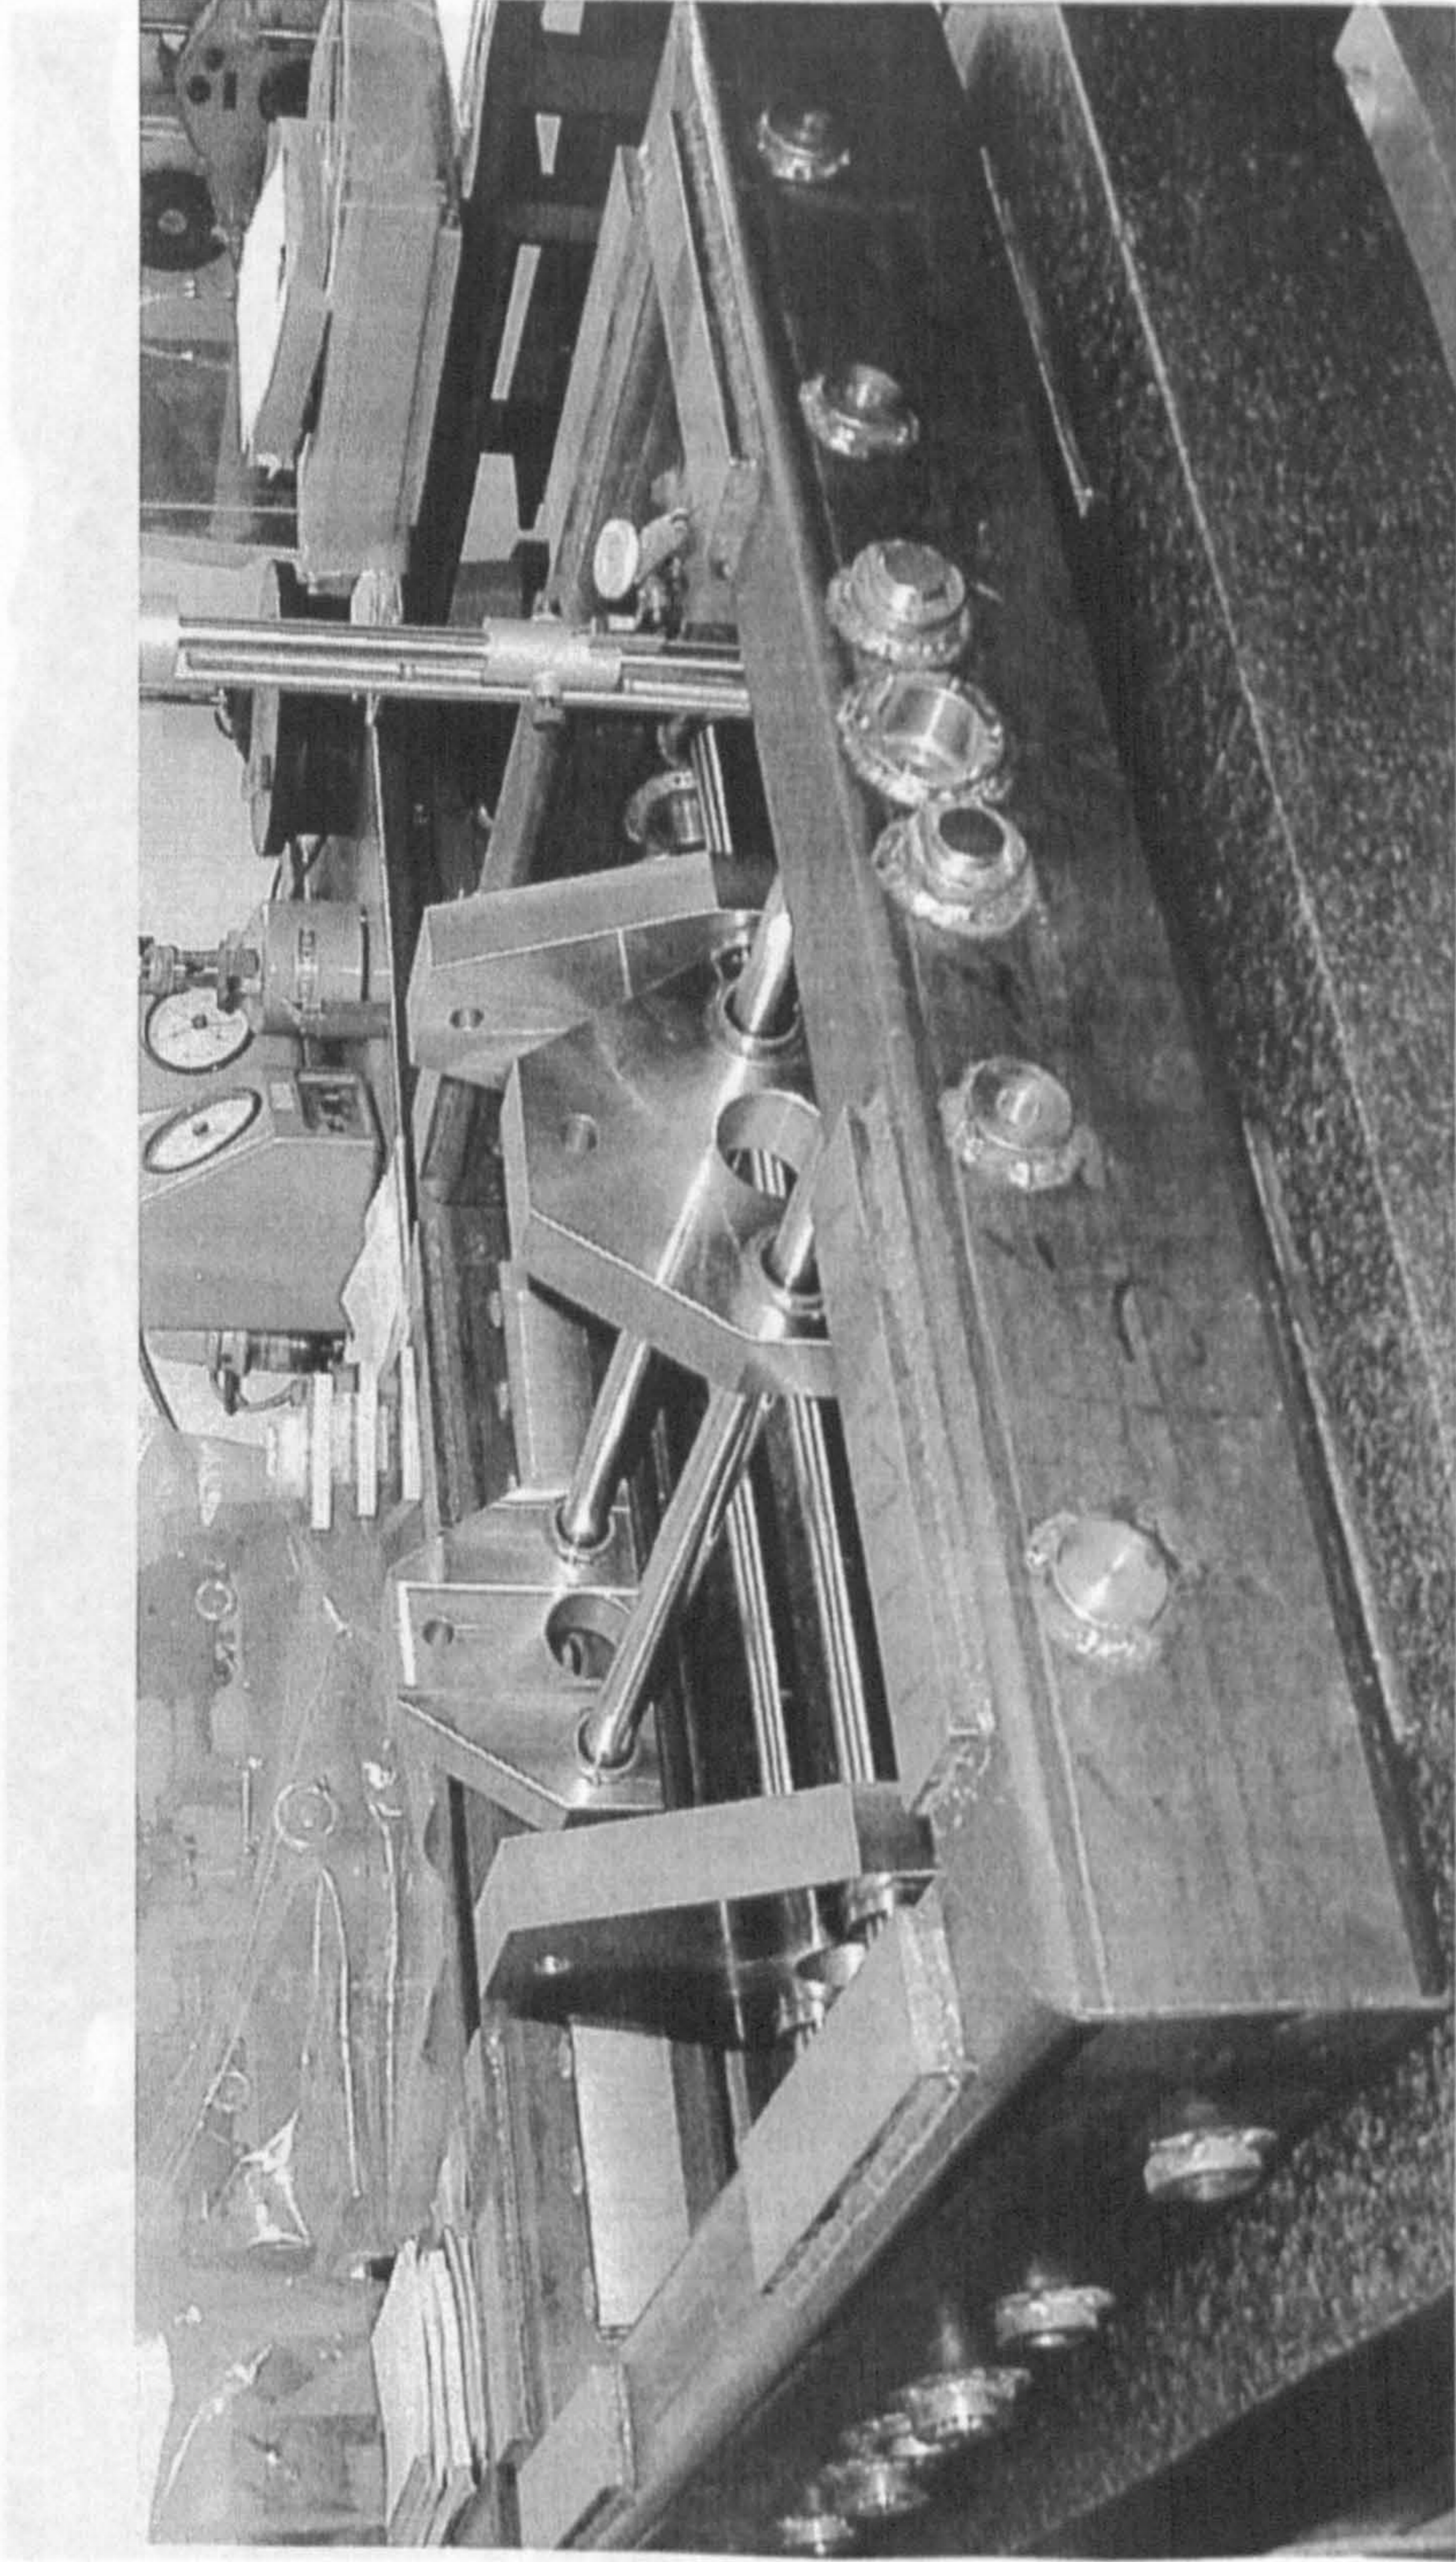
The four frames, carriages and linear shafts were in their initial assembly
